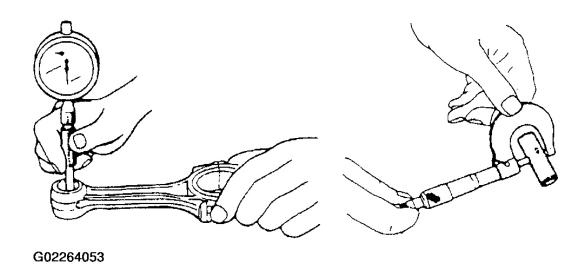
Measuring Piston Pin & Connecting Rod Small End Courtesy of SUZUKI OF AMERICA CORP.
